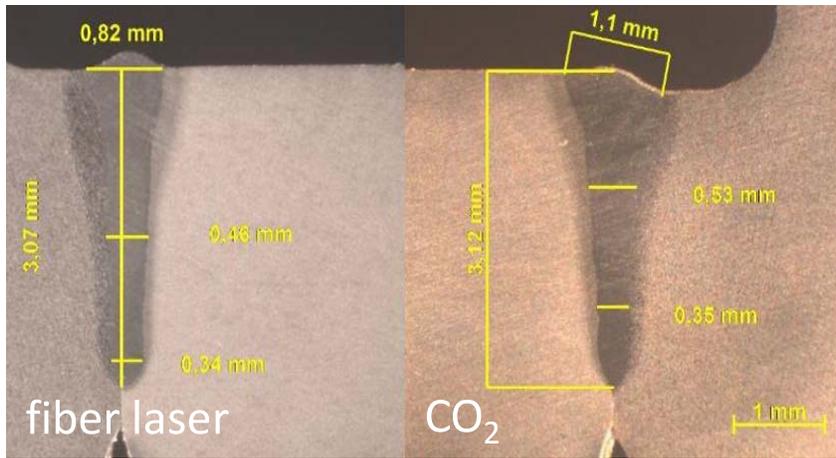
Fiber laser and CO₂ laser welding of powertrain gears show essentially identical results, that is, a deep penetration weld with good aspect ratio and no spatter. Both welds were done at the same feedrate of 3 m/min.
